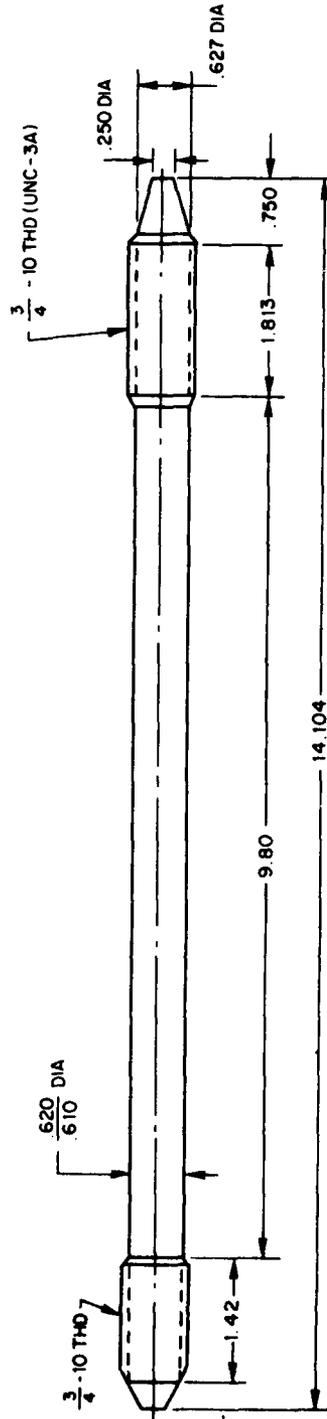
Nominal configuration and dimensions of MH-1A core hold down bolts
